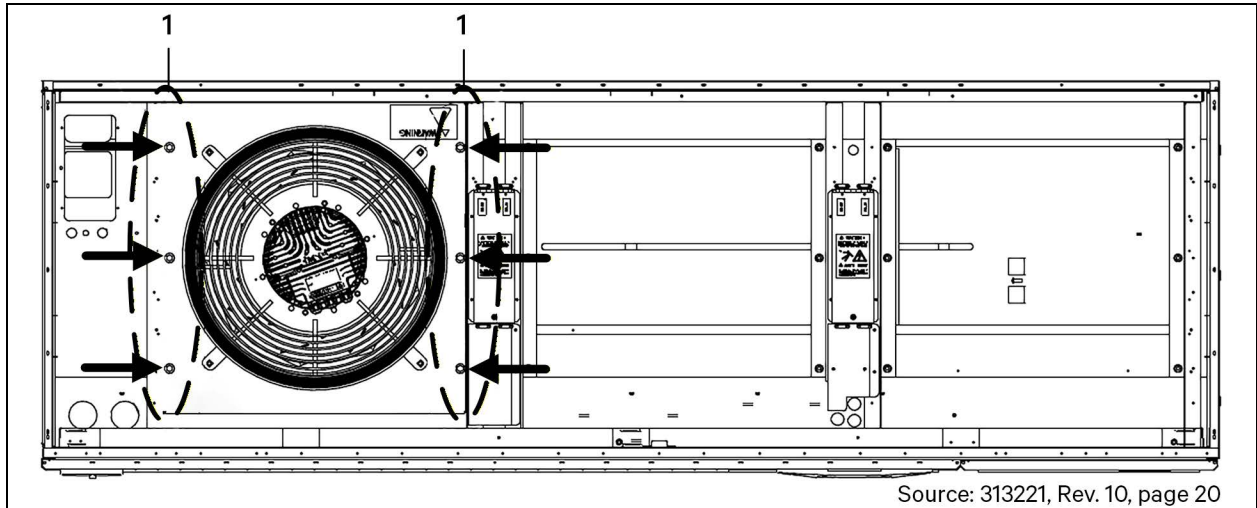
EC Fan mounting Hole Alignment for 73 in. and 85 in. Units
